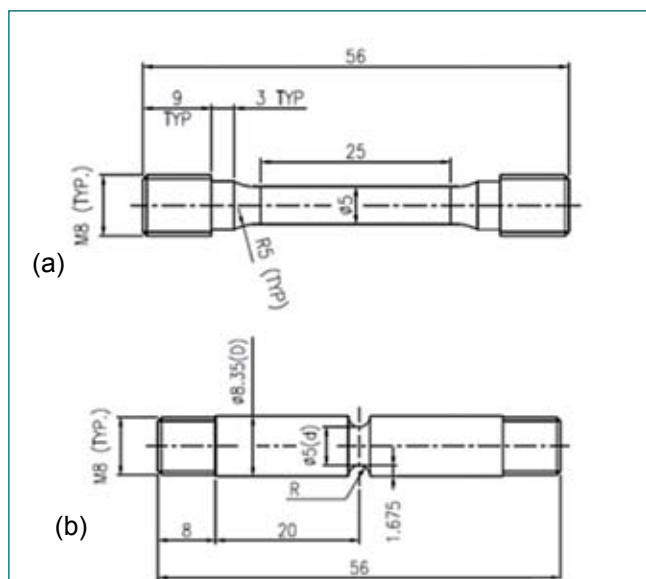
Geometries of (a) smooth and (b) notched specimen used for the tensile testing
